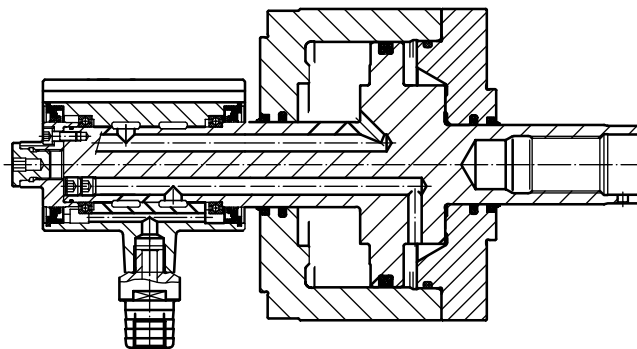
Closed-centre cylinder (hydraulic cylinder)
